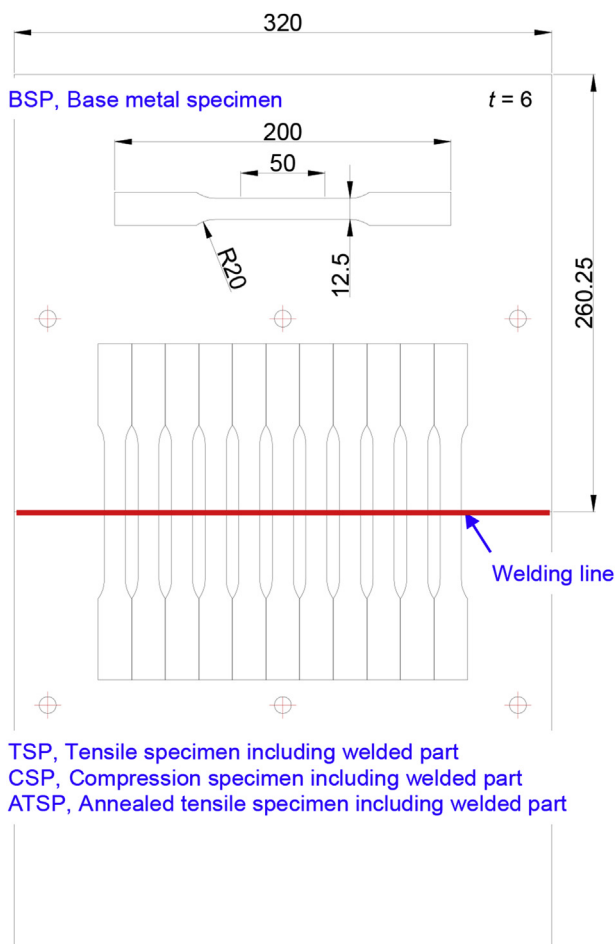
Schematic design of butt-welded specimen fabrication for tensile and compressive testing.
